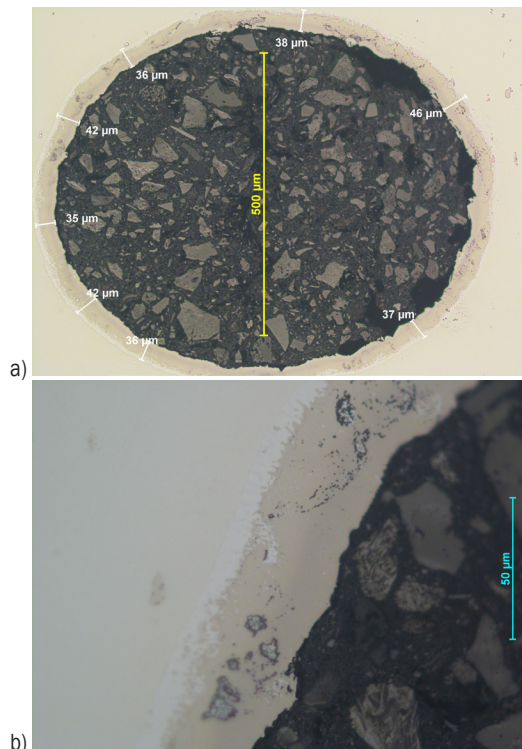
Section view of type "B" hole drilled with 0.4 mm electrode; a) complete hole view, and b) coating debris
